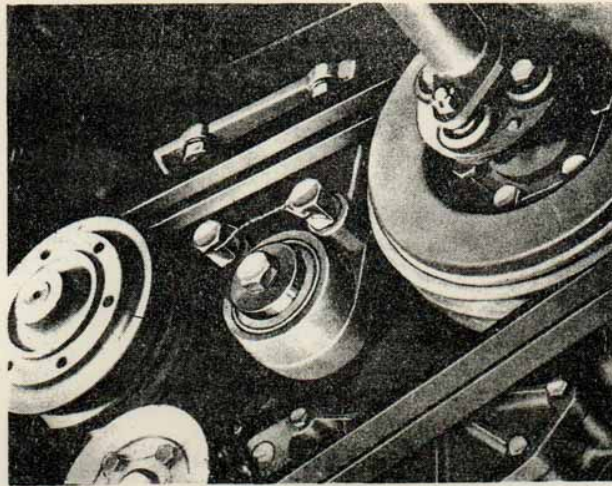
ENGINE FRONT MOUNTING BRACKET.
